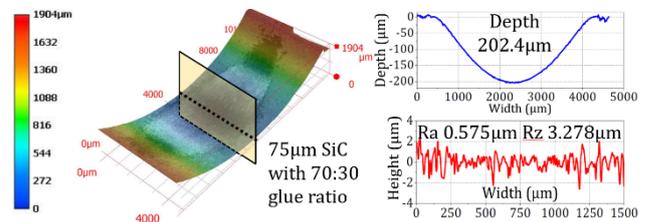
Surface roughness profile, three-dimensional and two-dimensional profile of polished footprint by a magnetic polishing tool with 75 μm SiC abrasive coating and 70:30 glue mass ratio
